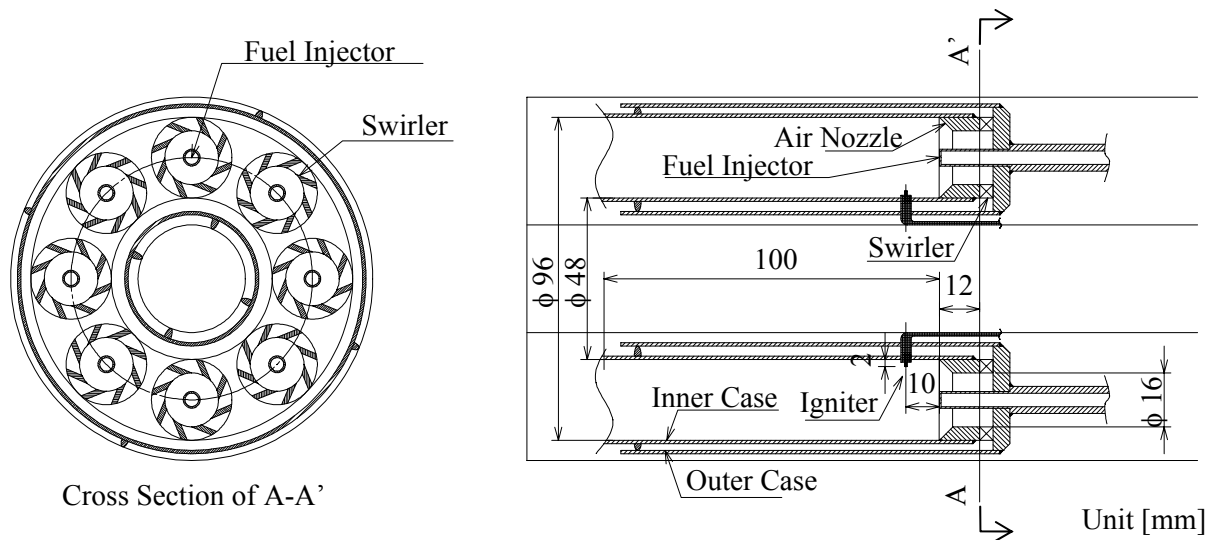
Design of Prototype Annular Micro Combustor for the Palmtop Gas Turbine.
